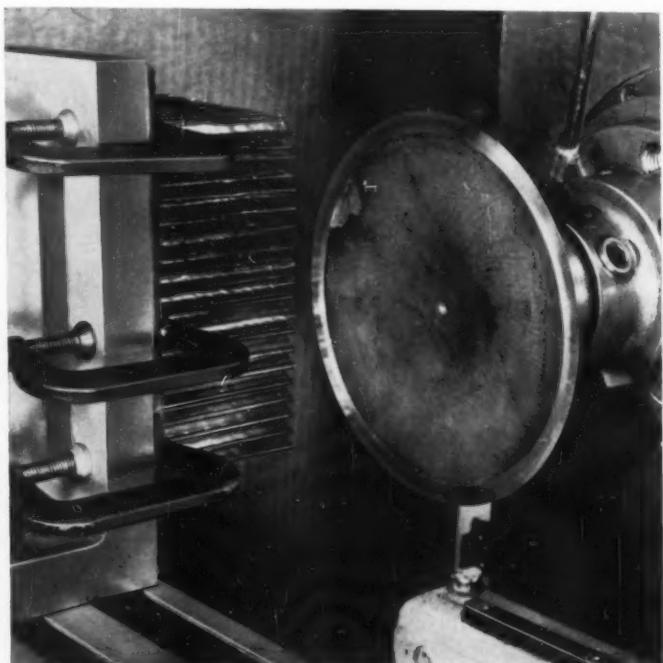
Same setup as that shown in the heading illustration. Here can be seen the cutting edge of the high-speed steel, mushroom-shaped tool. The 6-inch diameter knife edge has an included angle of 5 degrees.
